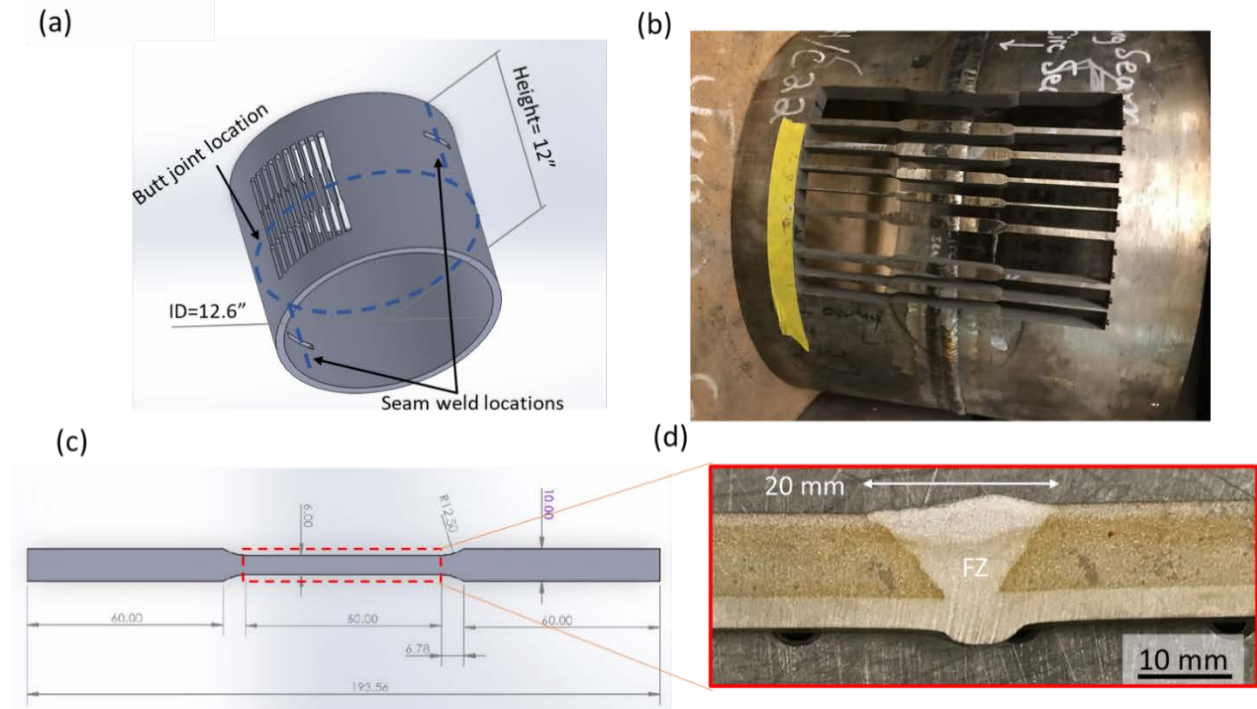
(a) Schematic showing tensile sample extraction locations within the pipe section relative to the locations of butt and seam joint, and the extracted metallurgical characterization samples across the seam weld, (b) picture of sample extraction, (c) sample geometry, and (d) close-up view of gauge section showing centering of FZ within gauge center
